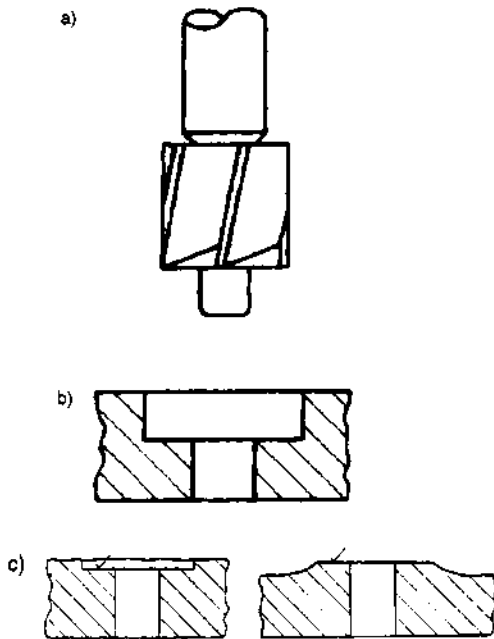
B2 A counterboring/spotfacing tool (view a) and a cross-sectional view of the counterbored hole it produces (view b). View c) shows cross-sections of two slightly different spotfacings produced by the same tool. The purpose of counterboring is to produce a recess of prescribed depth while spotfacing is performed to provide a smooth and perpendicular flat surface for a fastener or other object.
